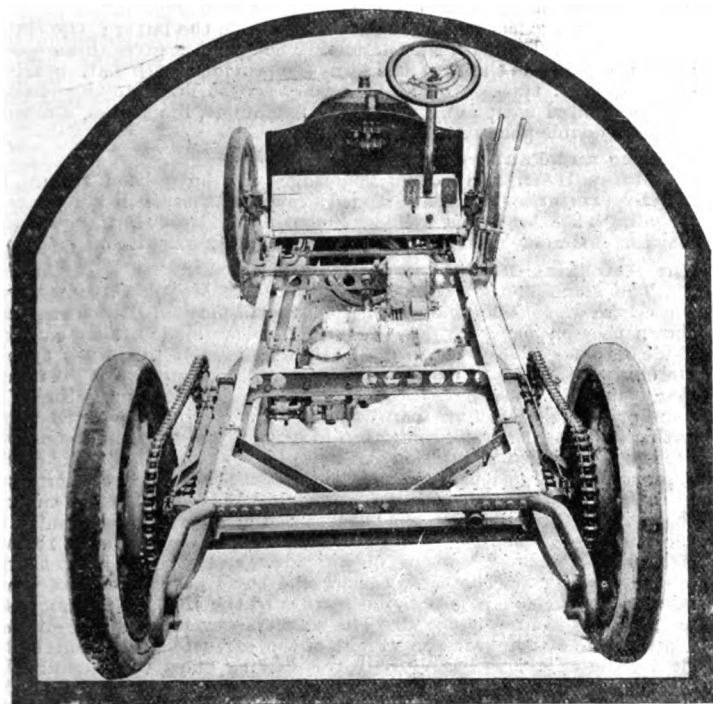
Rear View of Chassis of Crossley 22-28-h.p. Car.
